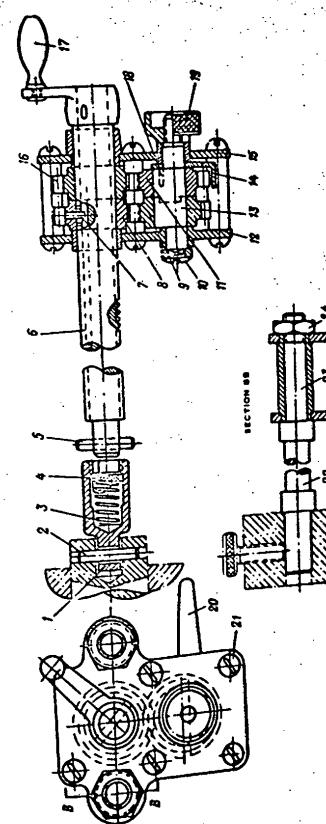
CUTTING TOOLS. LONGITUDINAL FEED REDUCTION GEAR USED WHEN BORING CONNECTING ROD HOLE
